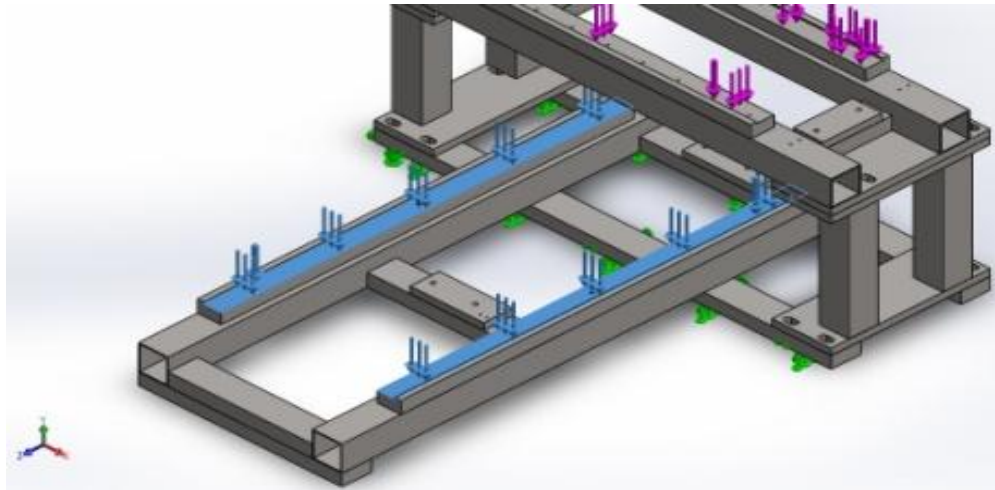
Force applying on Y axis of PCB Drill Mech SS 300 Structure
